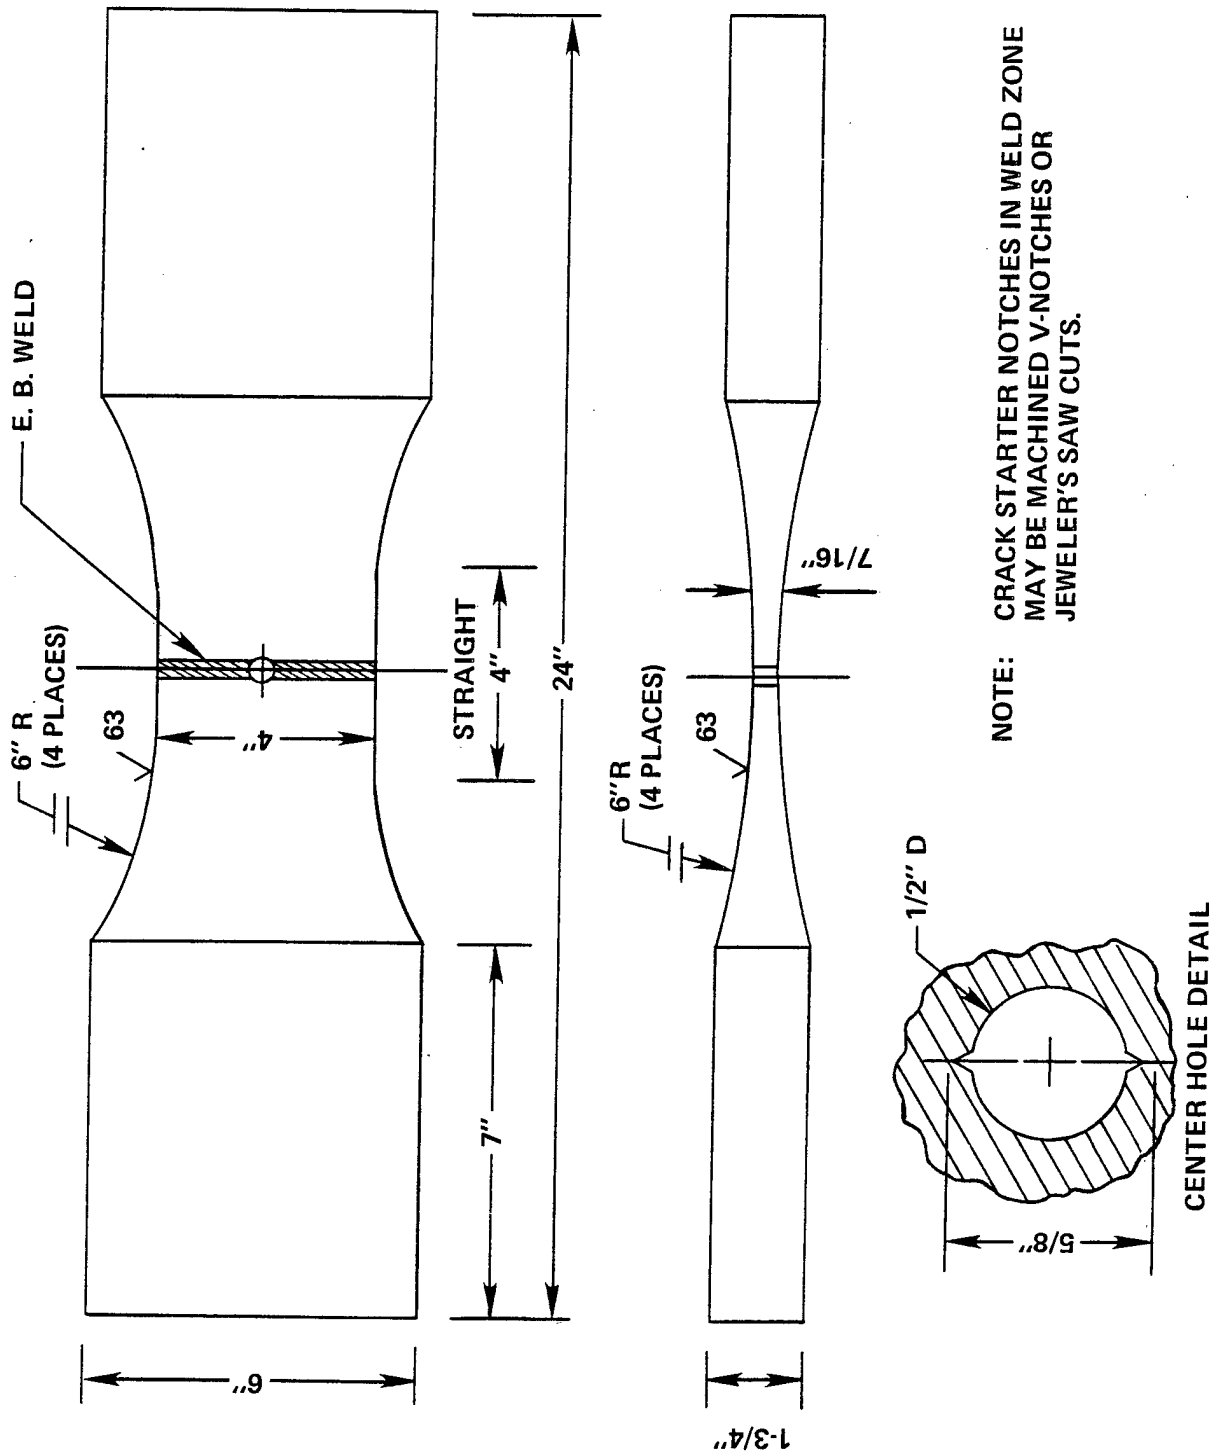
Titanium Flawed Electron Beam Weld Fatigue Specimen
